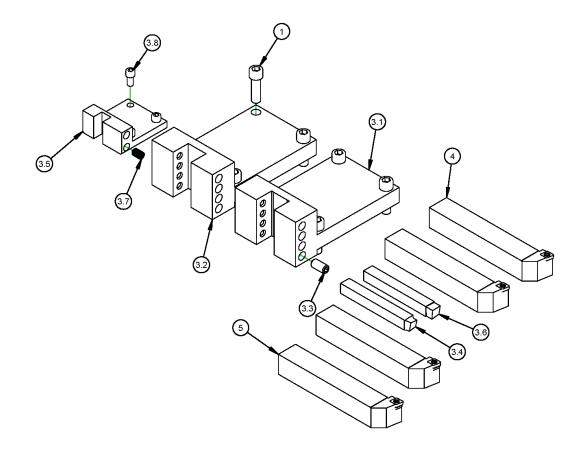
TOOL CARRIER ASSEMBLY (P/N 54224)
